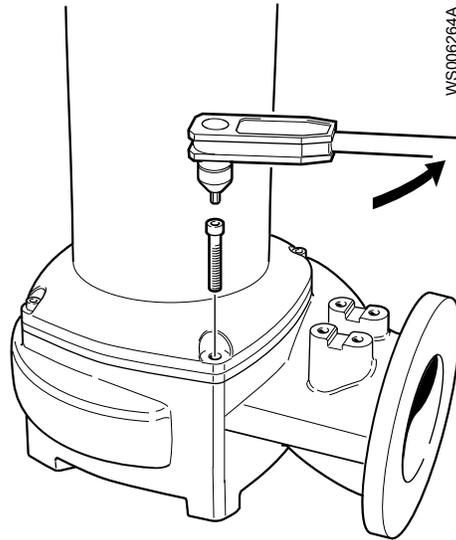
Removing the pump housing screws. Generic drive unit shown.
